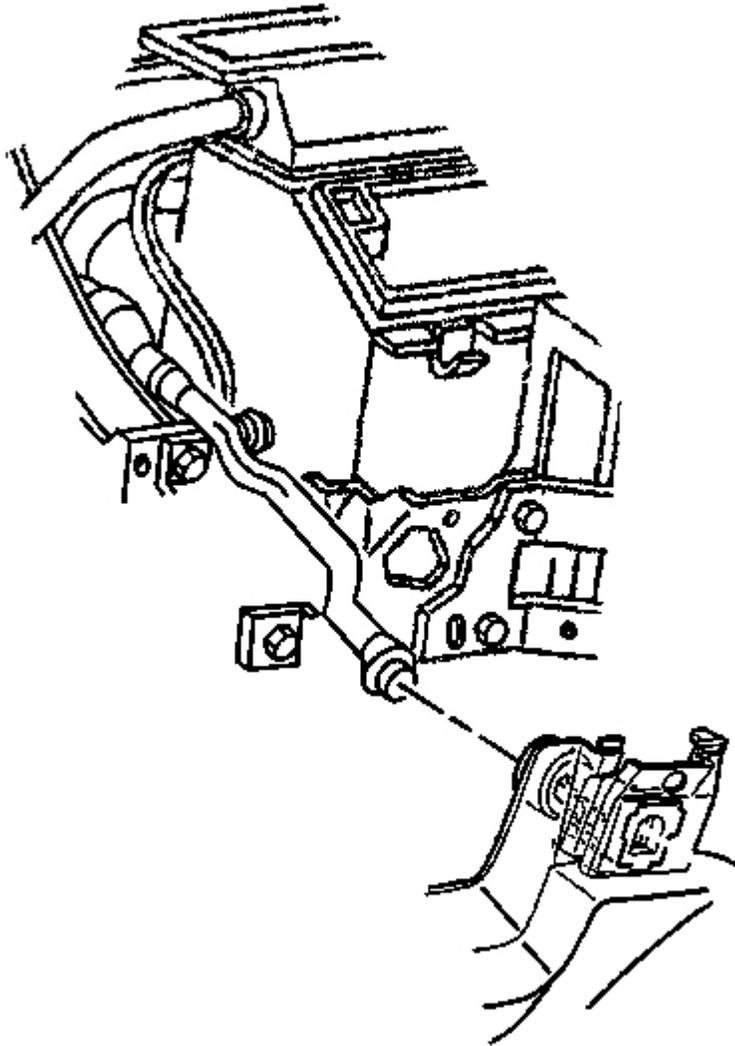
Drivers Knee Bolster Trim Panel, I/P Accessory Trim Plate & Inside Air Temperature Sensor Aspirator Duct
